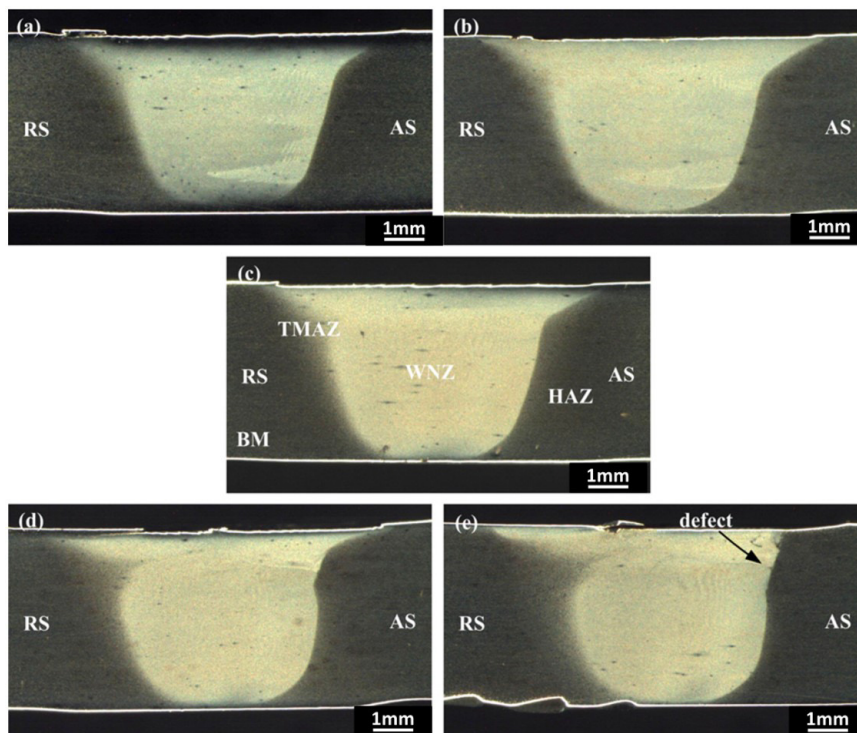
AA2219-T6 weld cross section of non-rotational shoulder assisted NRSA-FSW at constant 100 mm/min welding speed and different tool rotational speeds (a) 600 rpm, (b) 700 rpm, (c) 800 rpm, (d) 900 rpm, (e) 1000 rpm (abbreviations are mentioned in caption of Figure 17) [136].
